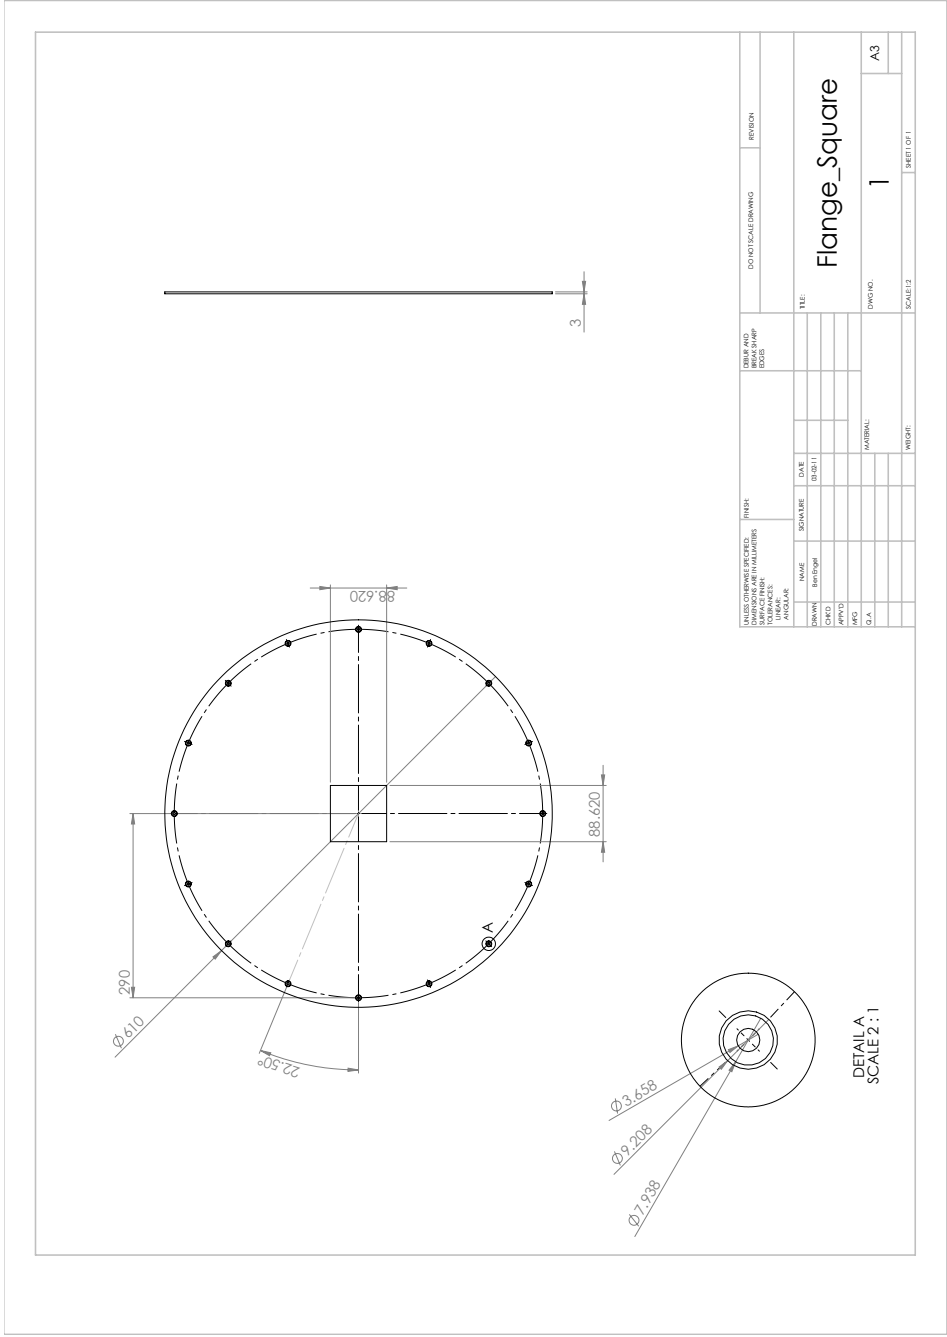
Technical Drawing of Prototype VFC Square Plate [9]
